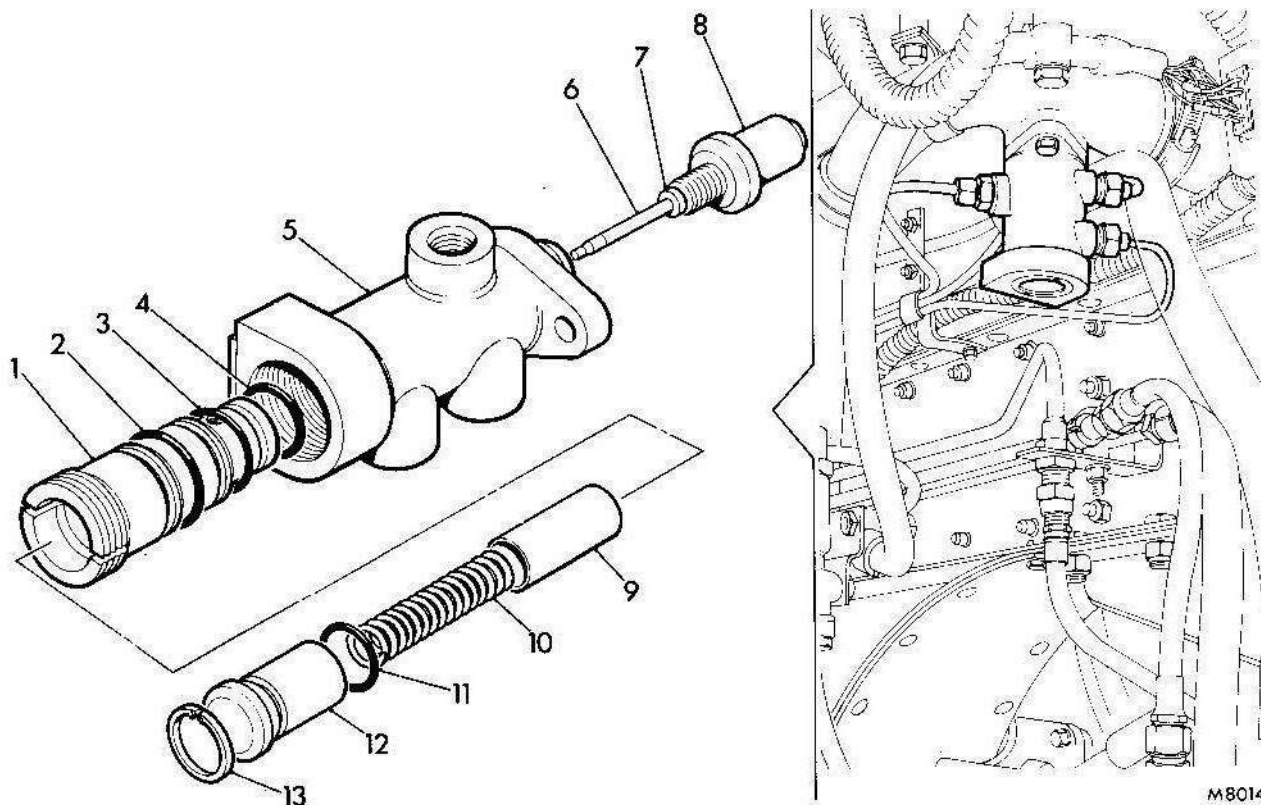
EXPLODED VIEW OF THERMOSTATIC VALVE
